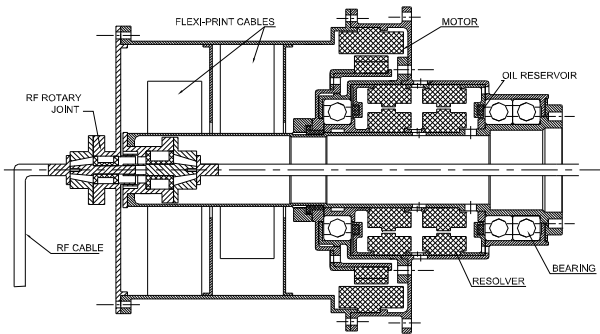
Sectional view of Azimuth drive module depicting its main elements supported by bearings over shaft and housing.
